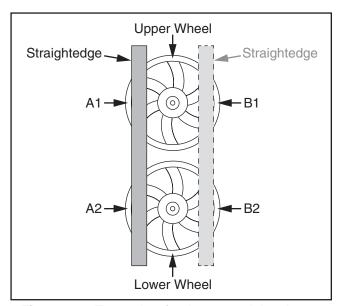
Example of using a straightedge to check lateral wheel alignment.
